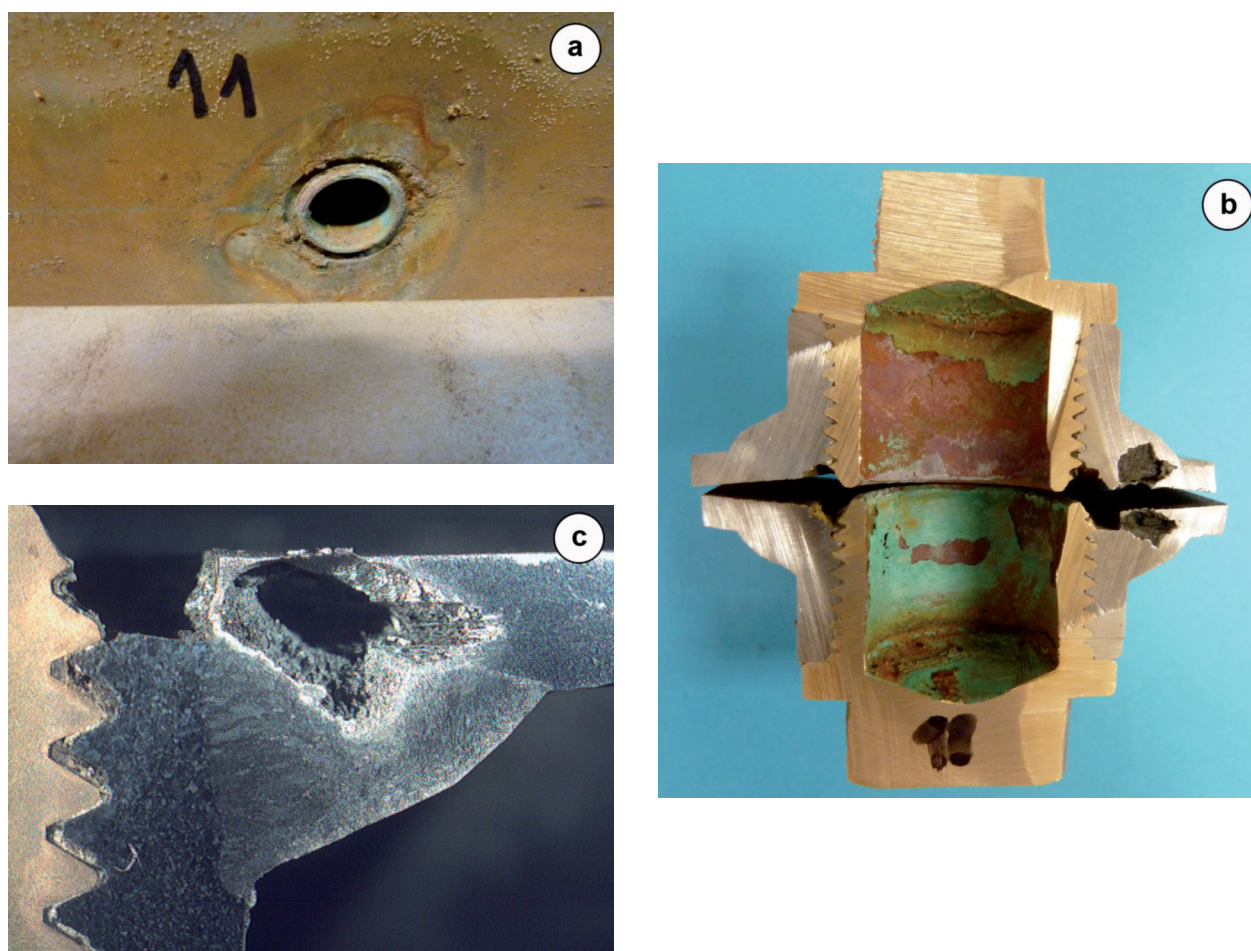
a) Interior of the F-11 specimen obtained from the 250-L water tank, corresponding to a nozzle welded only on the outside and fitted with a bronze plug pipe; b) Nozzle cut in two sections; c) Enlargement of b), showing subsurface pitting almost completely occupying the weld section.
